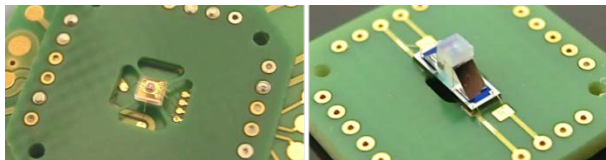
(left) PCB with assembled heater and laser; (right) PCB with optical assembly (optional collimating lens not shown).
